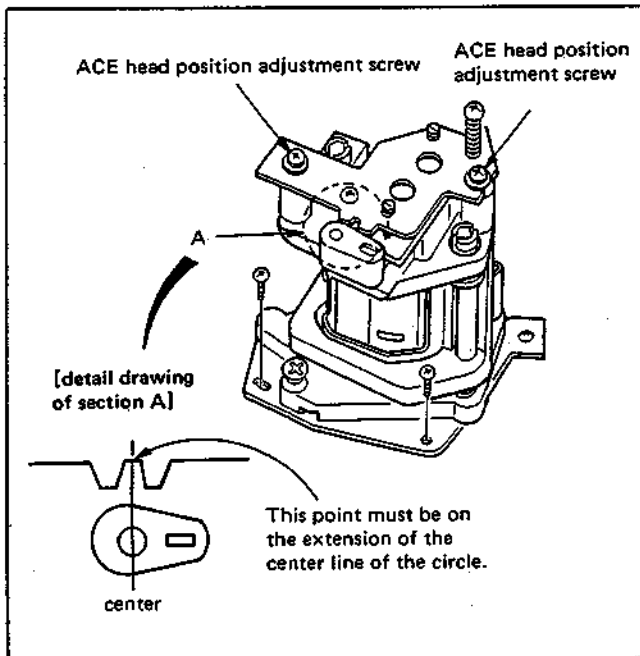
Position Adjustment of ACE Assembly (2)
